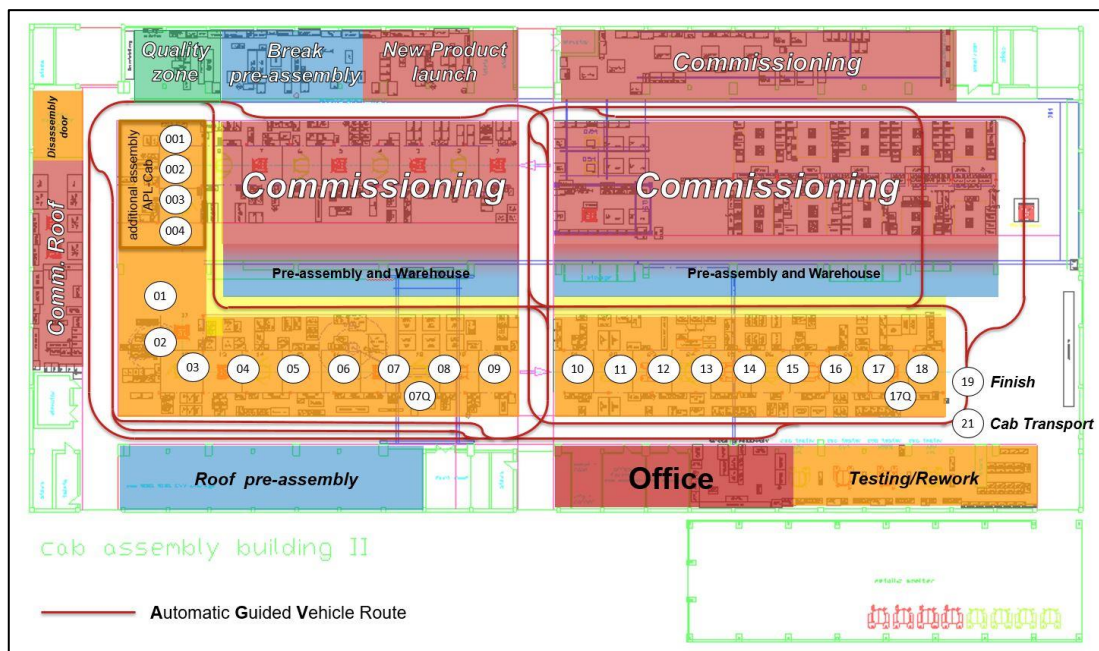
Cab Assembly Hall overview<sup>113</sup>
